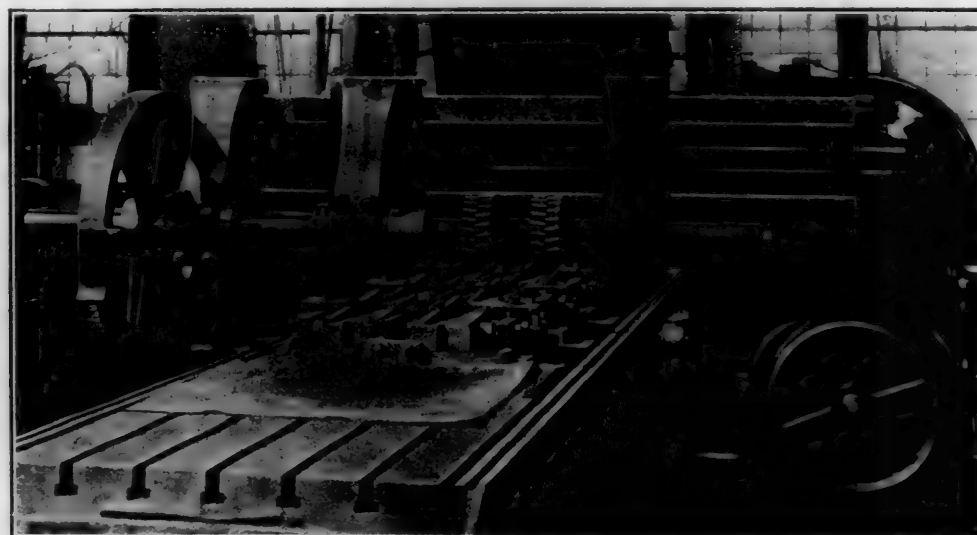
FINISHING THE INSIDE SURFACES OF SHOES AND WEDGES.
